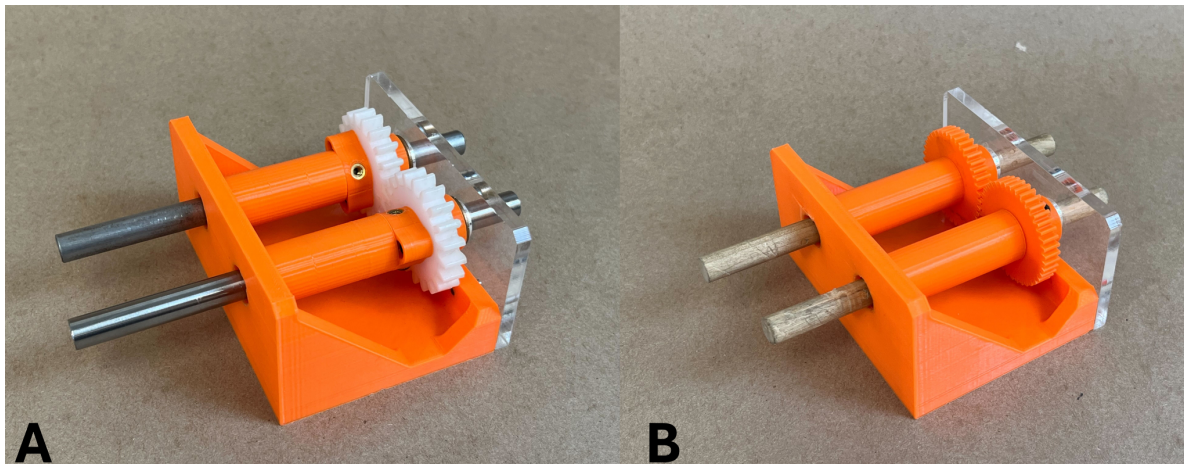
Gear assembly task with well designed gears (A) and poorly designed gears (B)
